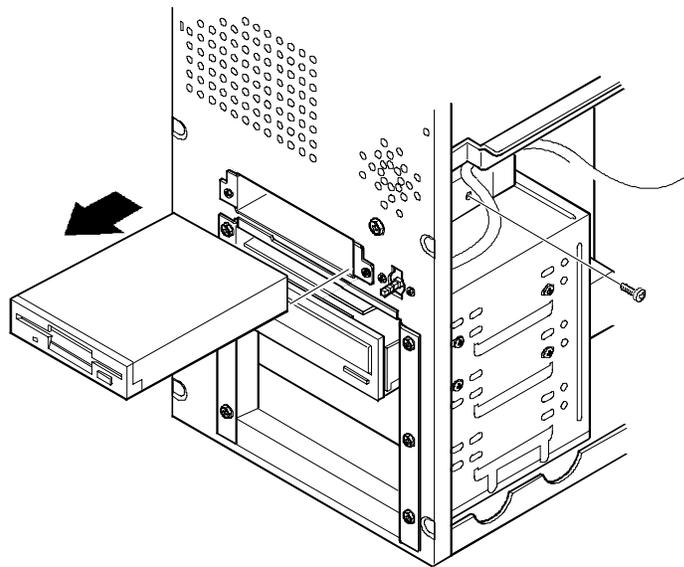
6 Removing the 3½-Inch Diskette Drive
